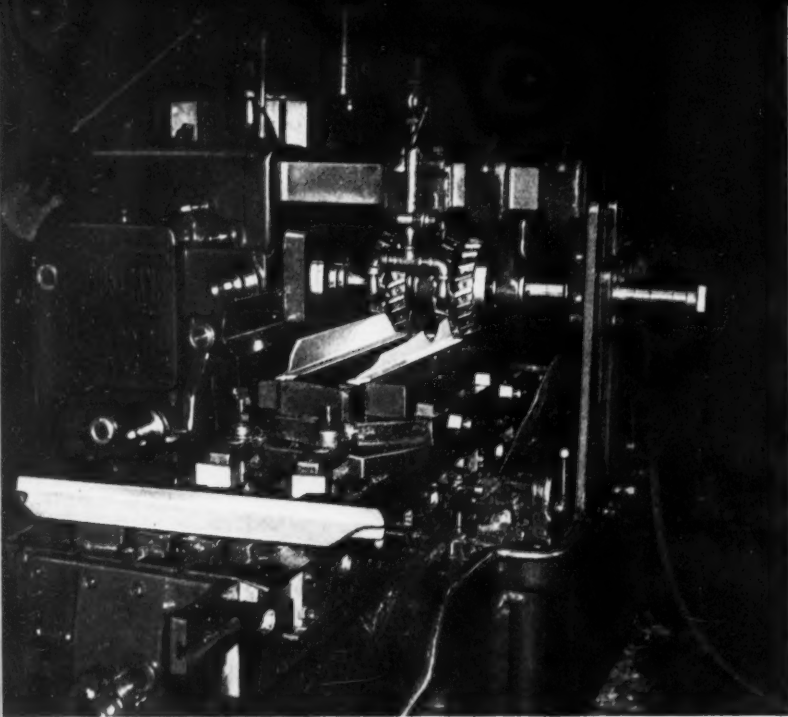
Milling Machine Tooled up for Finishing Eight Surfaces on Nickel-chromium-molybdenum Steel Forgings that Must be Straight within 0.005 Inch in a Length of Eighteen Inches
